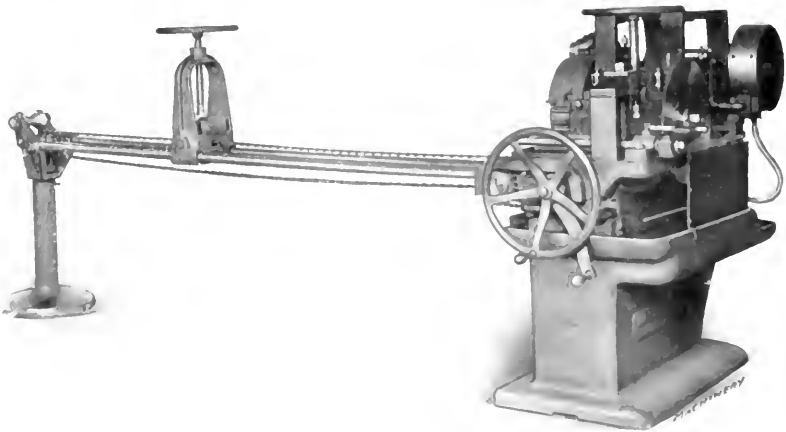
Combination Guard and Lubr. ator for Nutter & Barnes Machines
